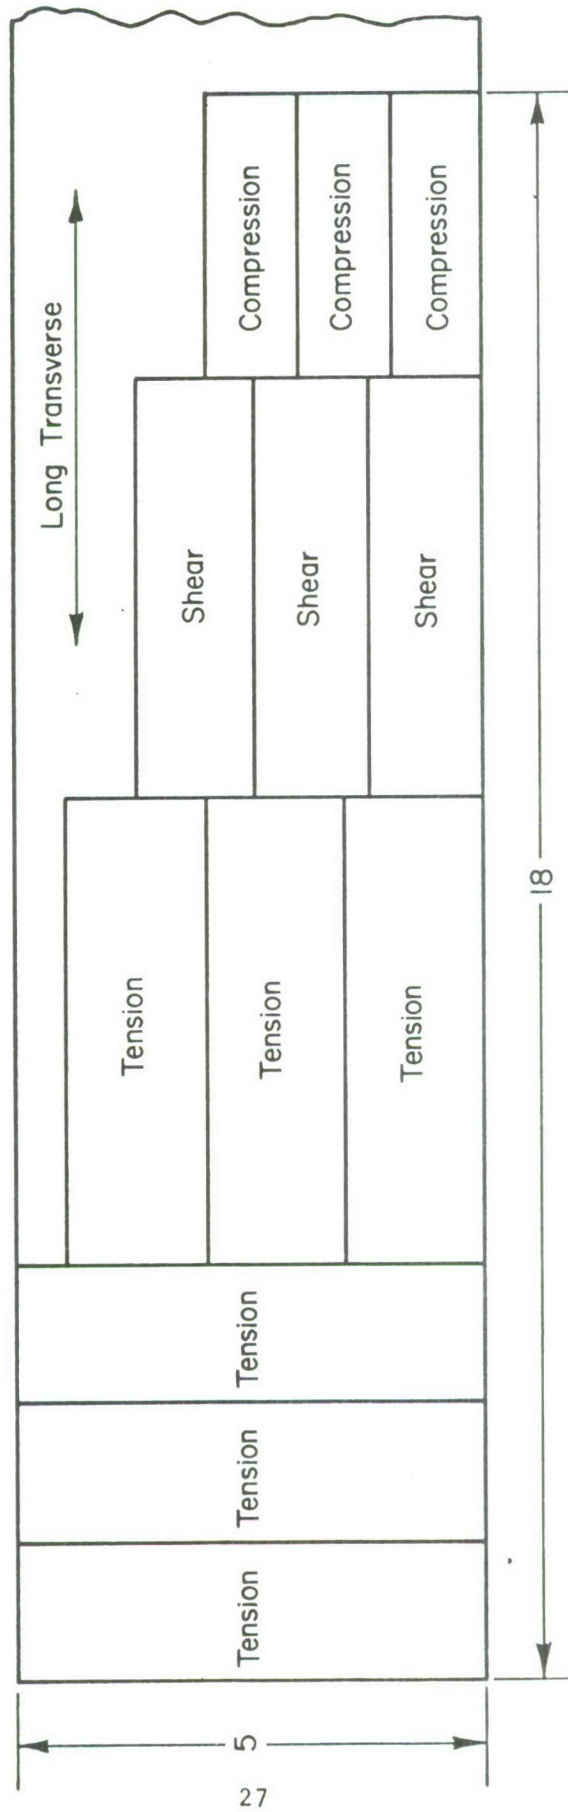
LOCATION OF TEST SPECIMENS FOR ALLOY 188 SHEET -- CODES G, H, AND I
